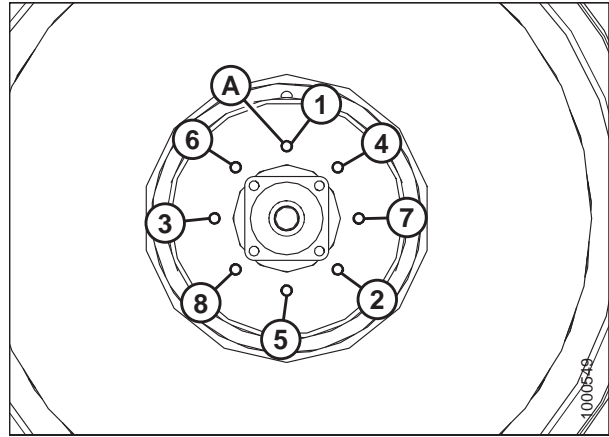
Forked Caster Wheel Nut Tightening Sequence
